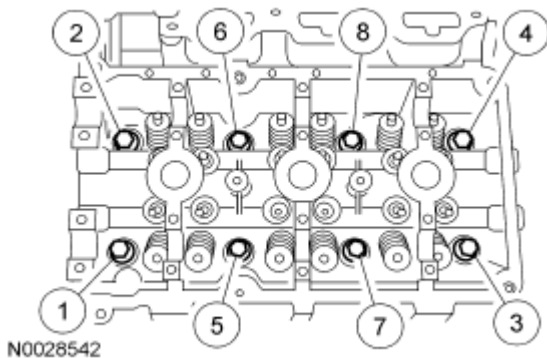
Identifying Loosening Sequence Of Cylinder Heads Bolts
